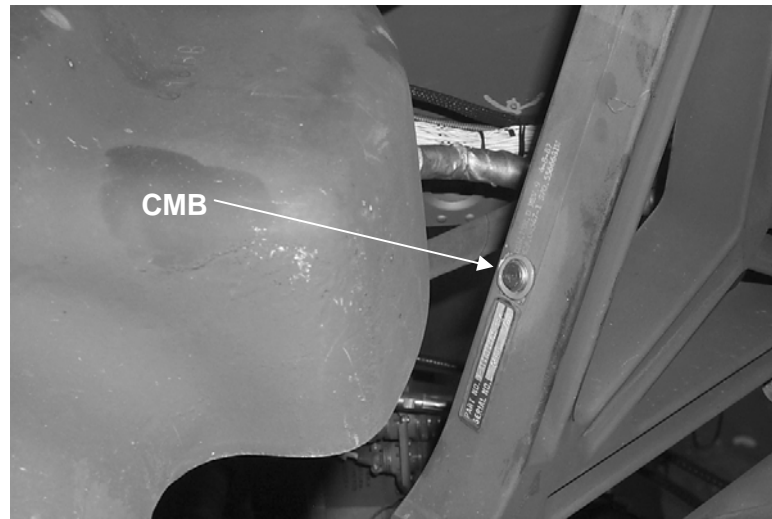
Longitudinal Torque Link Assembly (AH-64A/D) with CMB Installed
